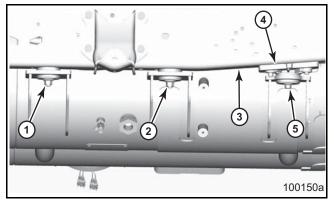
Right-Side Tank Frame Mounting Fasteners
